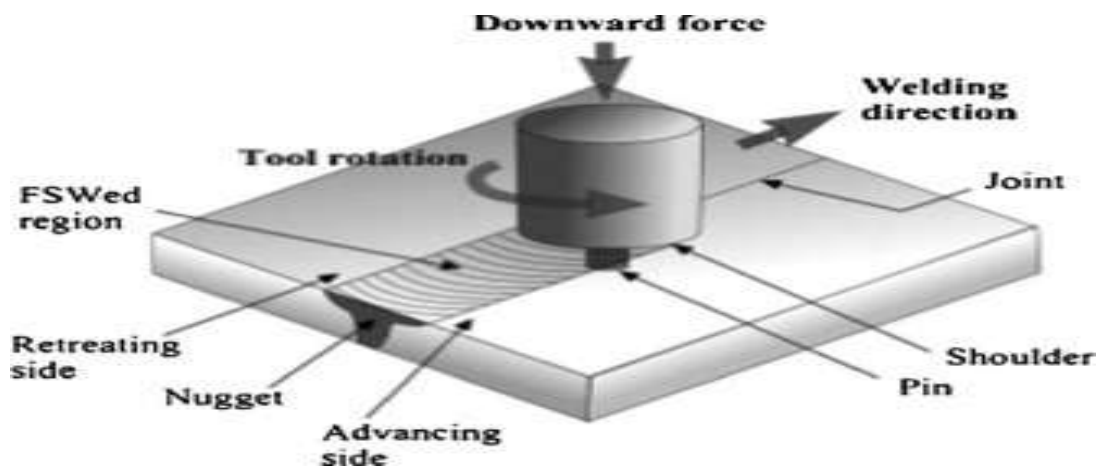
Operation of friction stir welding (<http://en.wikipedia.org>)
